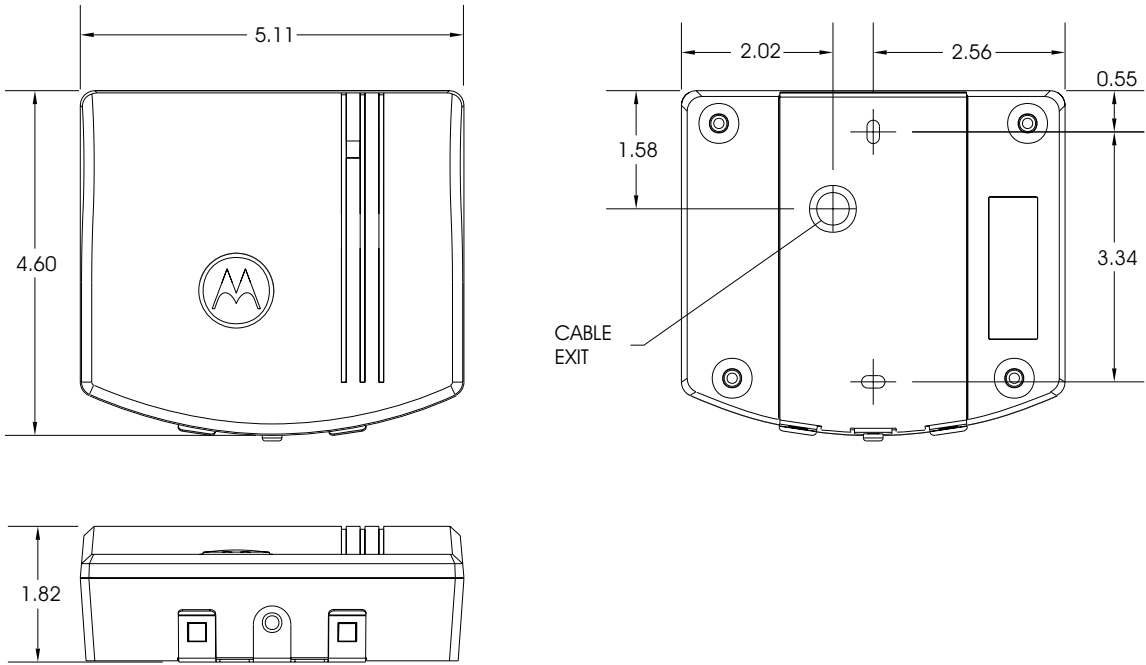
M-Smart™ MultiPass Mechanical Dimensions
